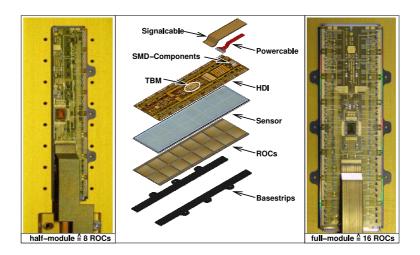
Exploded view (middle) of a barrel pixel detector fullmodule (right) and picture of an assembled half-module (left)
